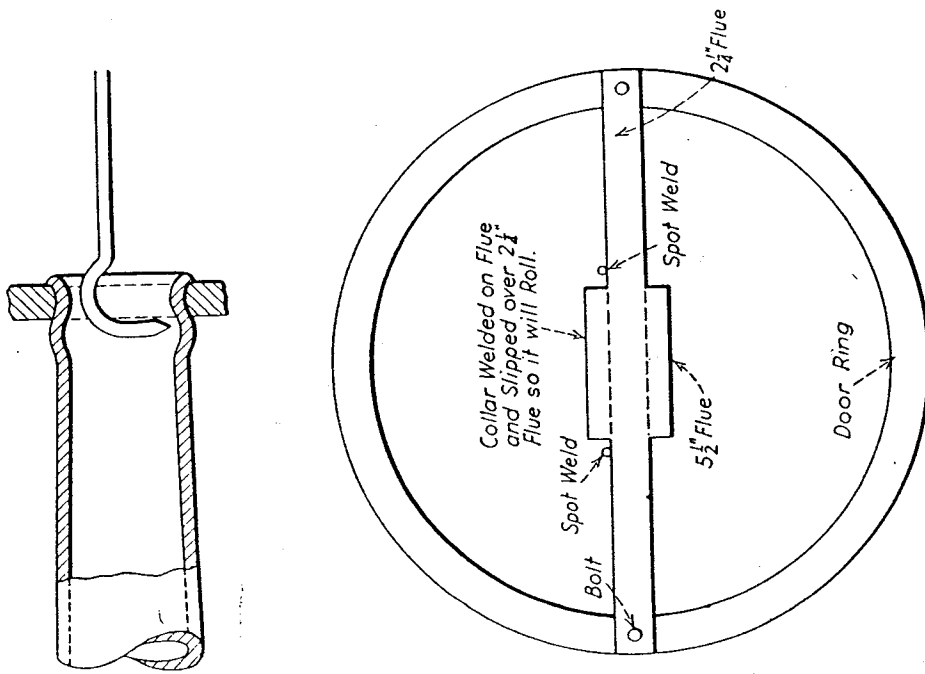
(Above)—Handy bar for detecting soft flues when cinder cut is just back of prosser mark; (Below)—Handy arrangement placed in front at smokebox for removing flues from the boiler.
